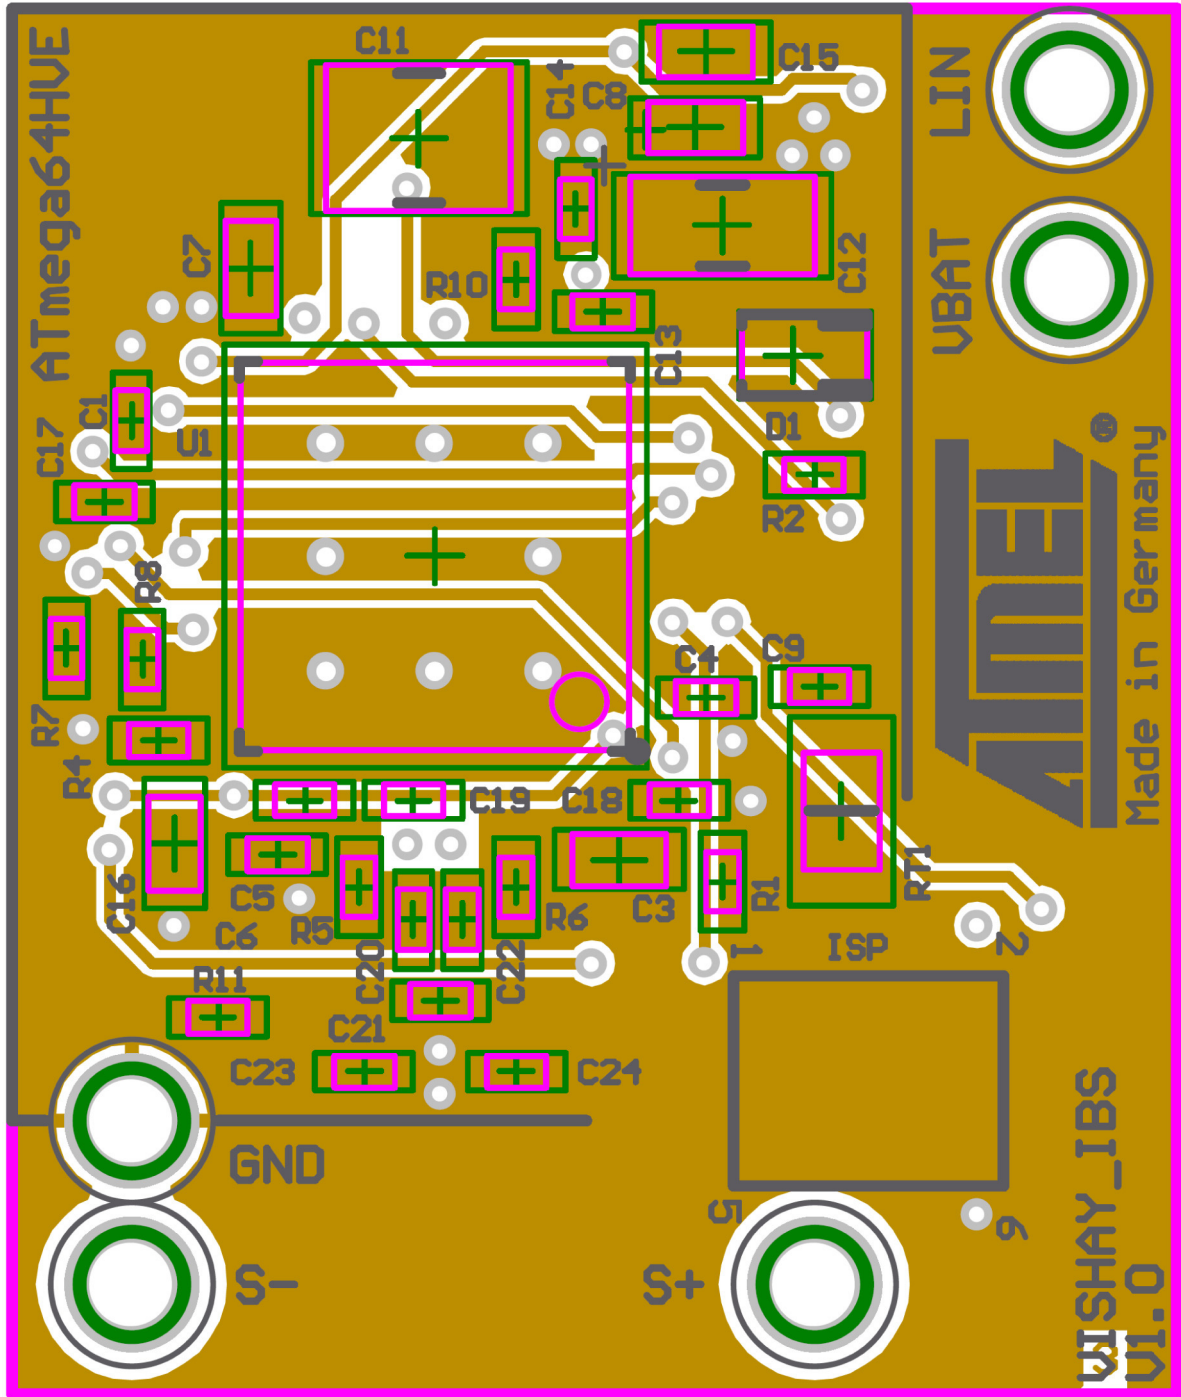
PCB Layout of IBS Module, Bottom Layer (View: Top Layer)
